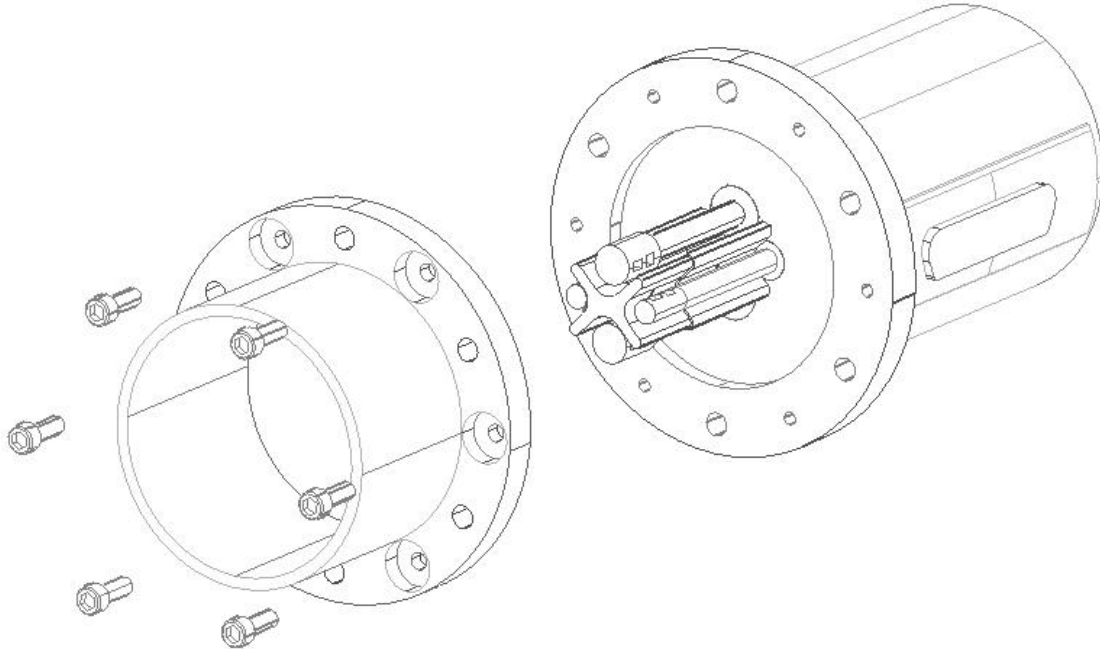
Details of connector mounting to rear of SCAL baseplate.
